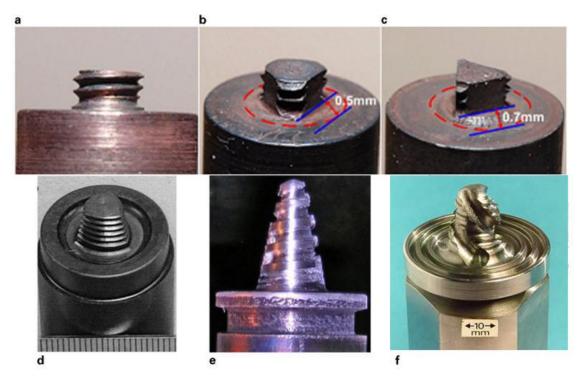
Commonly FSW tool pin geometries [21] a) Cylindrical threaded, b) Three flat threaded c) Triangular; d) Trivex; e) Threaded conical f) schematic of a tri flute
